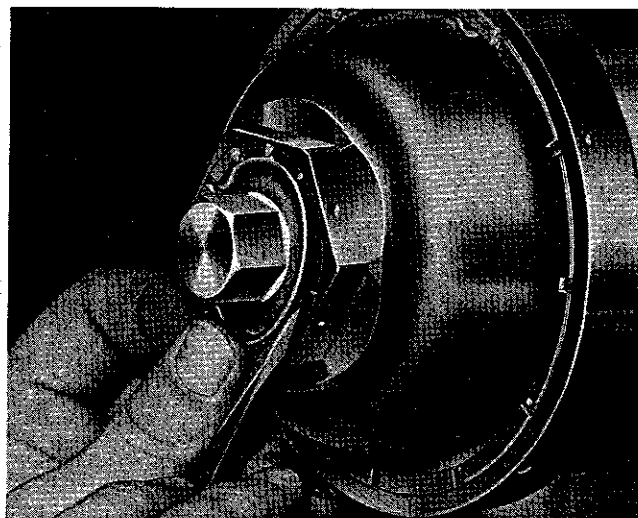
Installing Cylinder Head Clamp Nut Lock Ring — 2E40 Model
